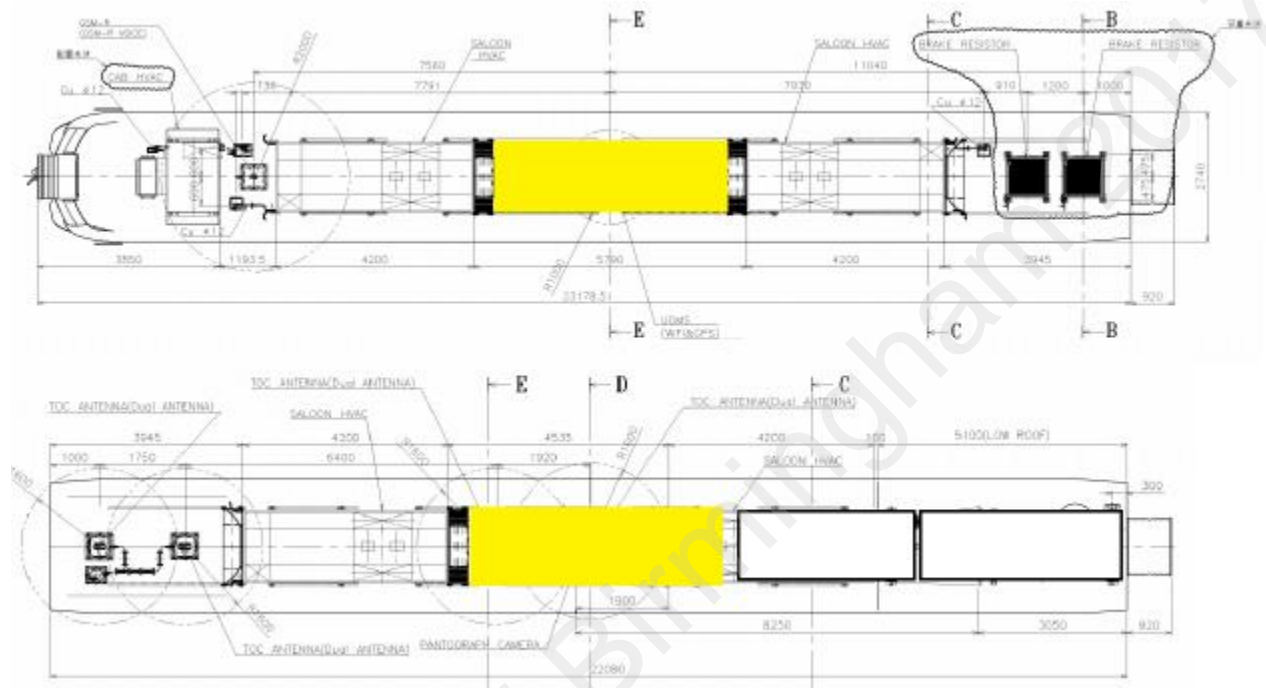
AT200 Plan View of Available Roof Space (Hitachi Rail, 2016)
